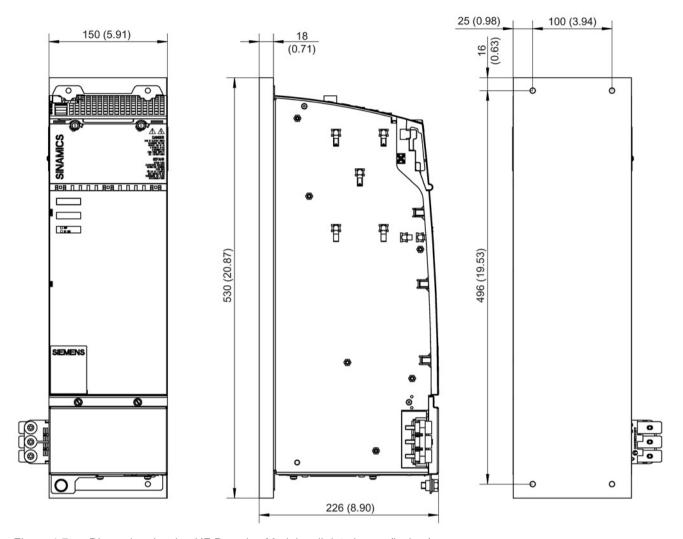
Dimension drawing HF Damping Module, all data in mm (inches)
